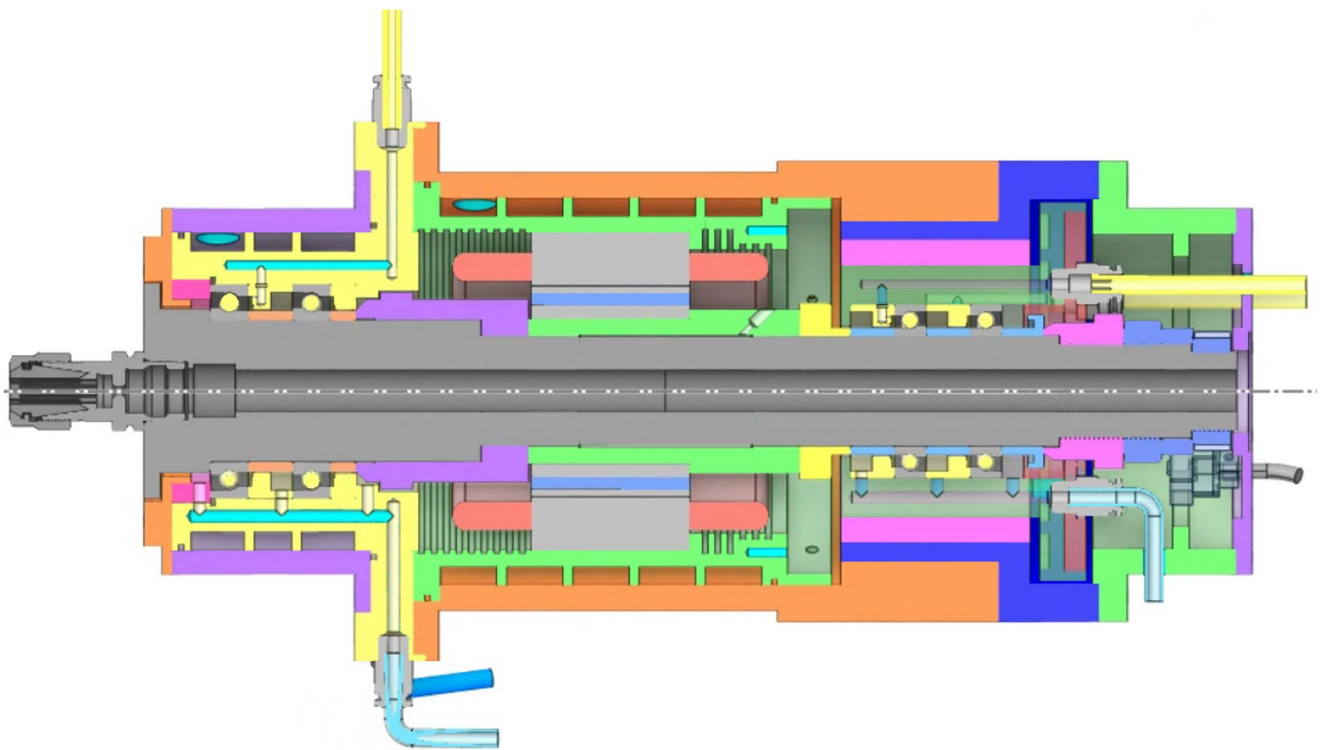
A High-Speed Spindle Design for 40,000 RPM
